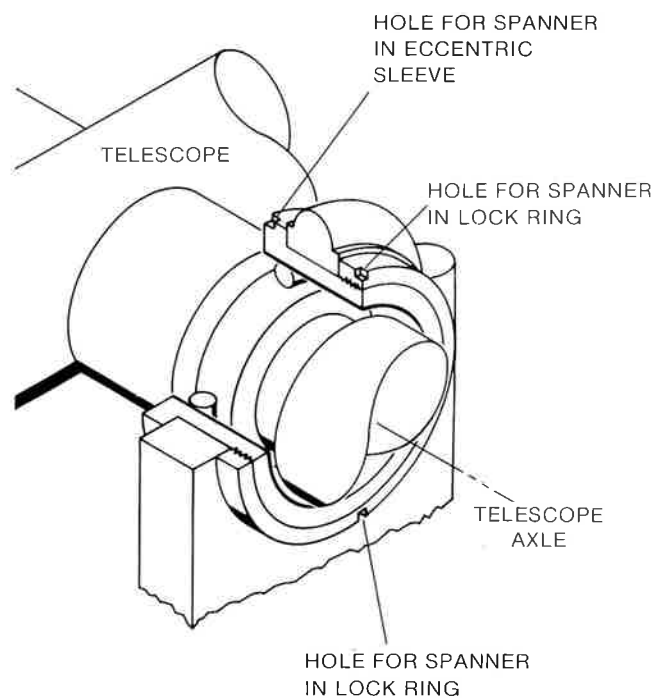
Telescope Axle Adjustment for Jig Transit Telescope Square
